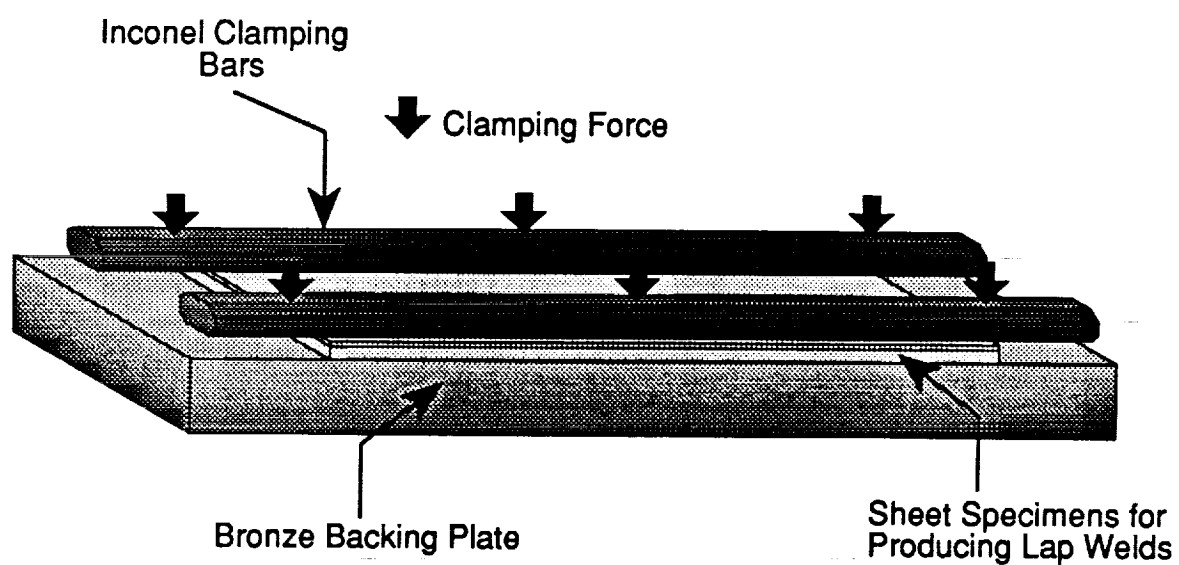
Clamping Arrangement Utilized for Initial Process Parameter Development for Lap-Welds.
